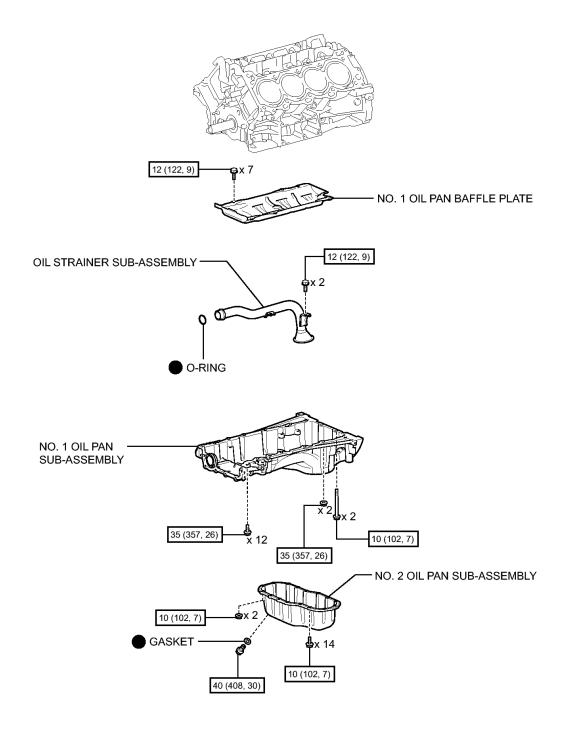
Exploded View Of Engine Unit Replacement Components With Torque Specifications (12 Of 13)
